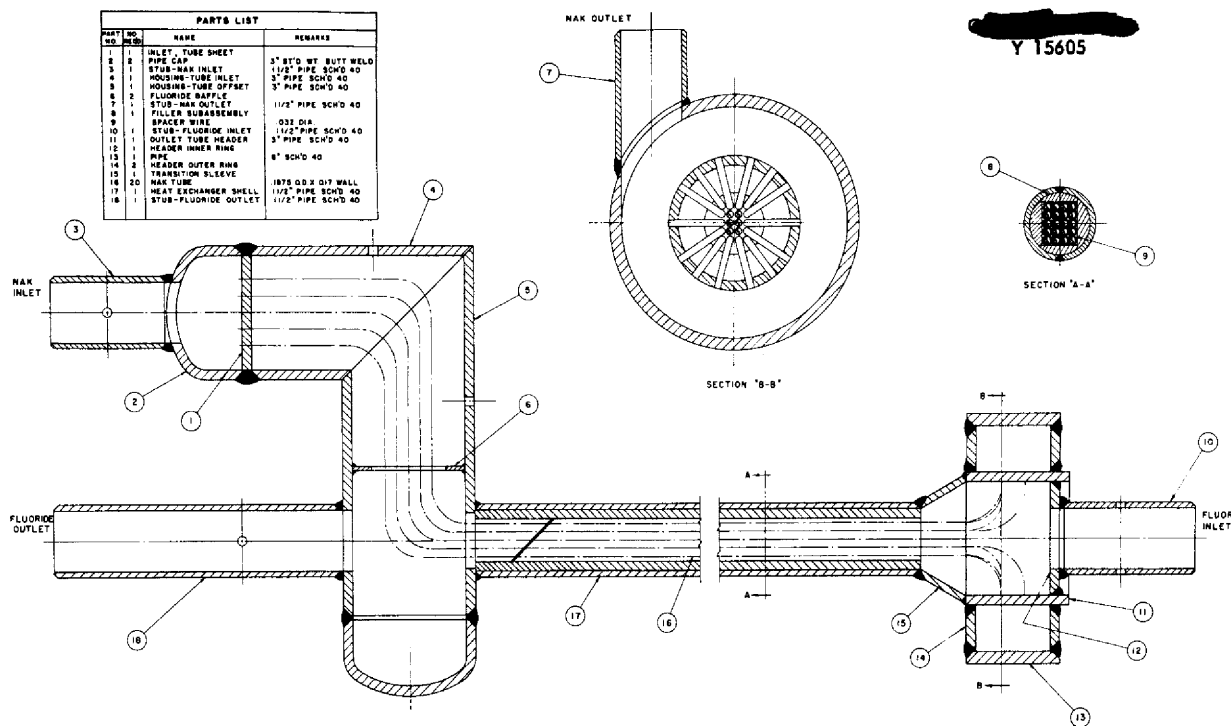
Assembly Drawing of 20-Tube High-Velocity Heat Exchanger.
